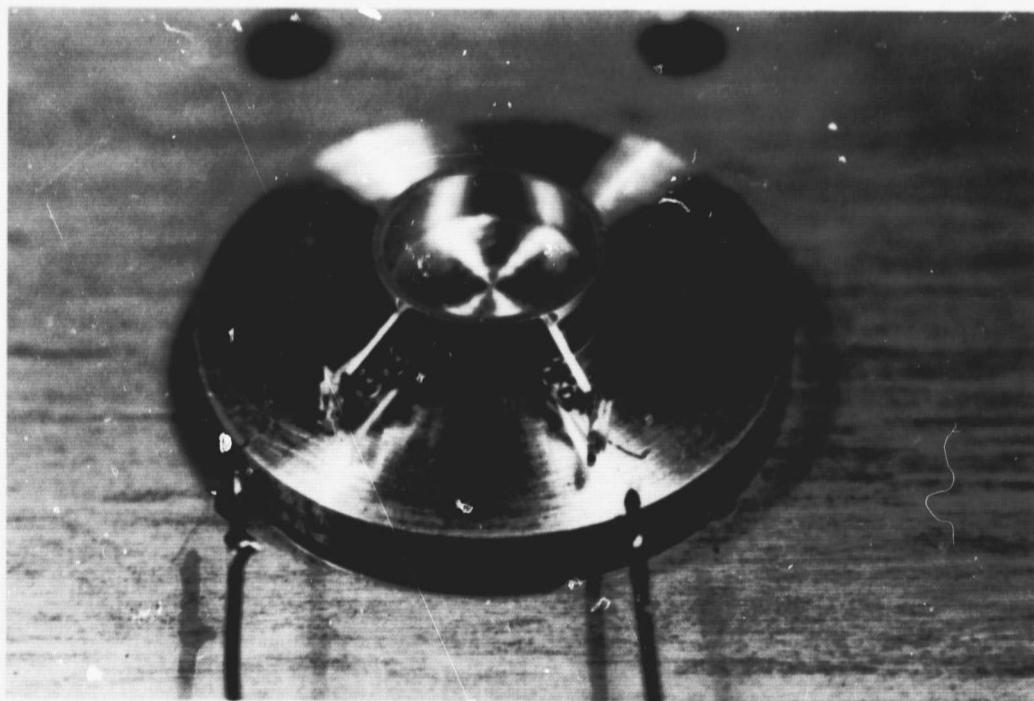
Construction details of insulated support for laser welded pendulum.
